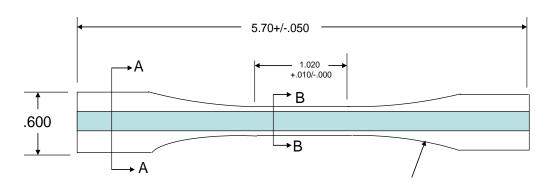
Schematic of "Clad" Test Coupons with TMC Section Highlighted in Blue (Courtesy of FMW)
